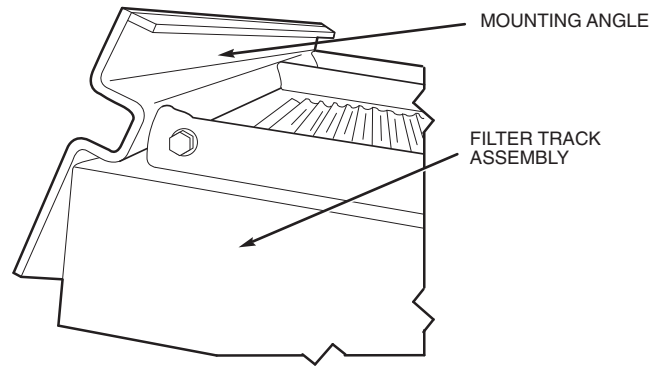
Mounting Angle Attached to Filter Track Assembly
